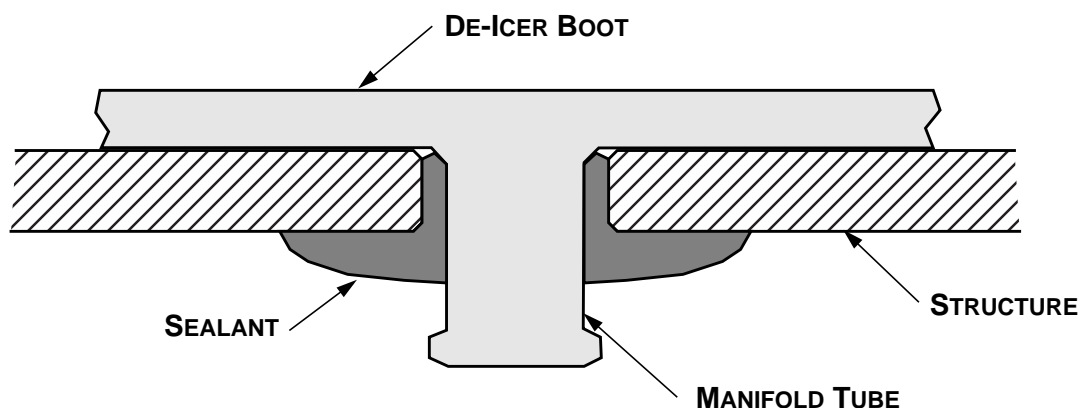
CROSS SECTION OF SEALANT AROUND MANIFOLD TUBE
